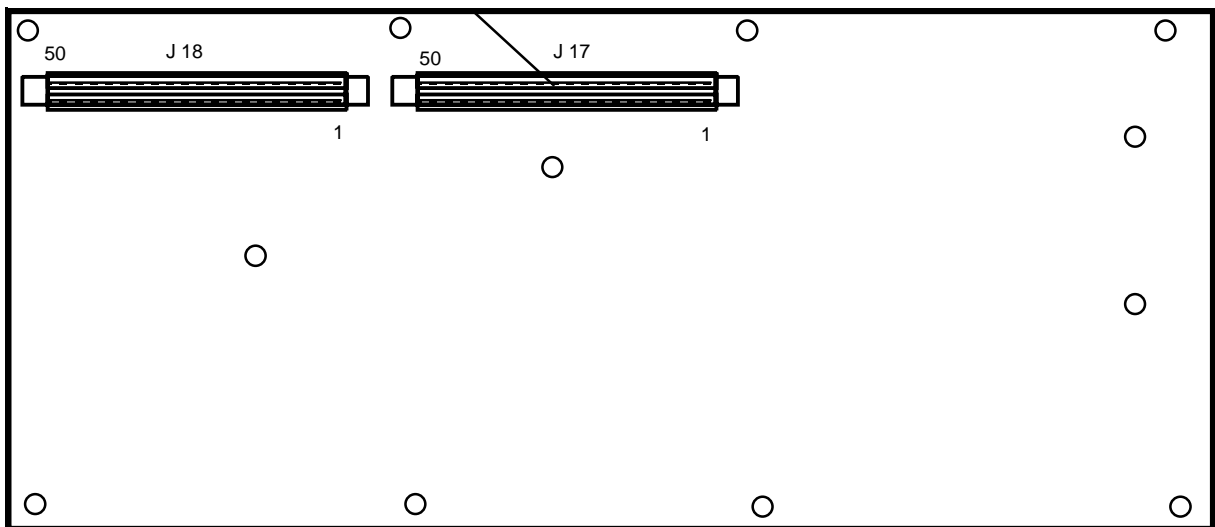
Expansion Shelf Backplane 50-Pin Ribbon Cable Connectors (Rear View)
